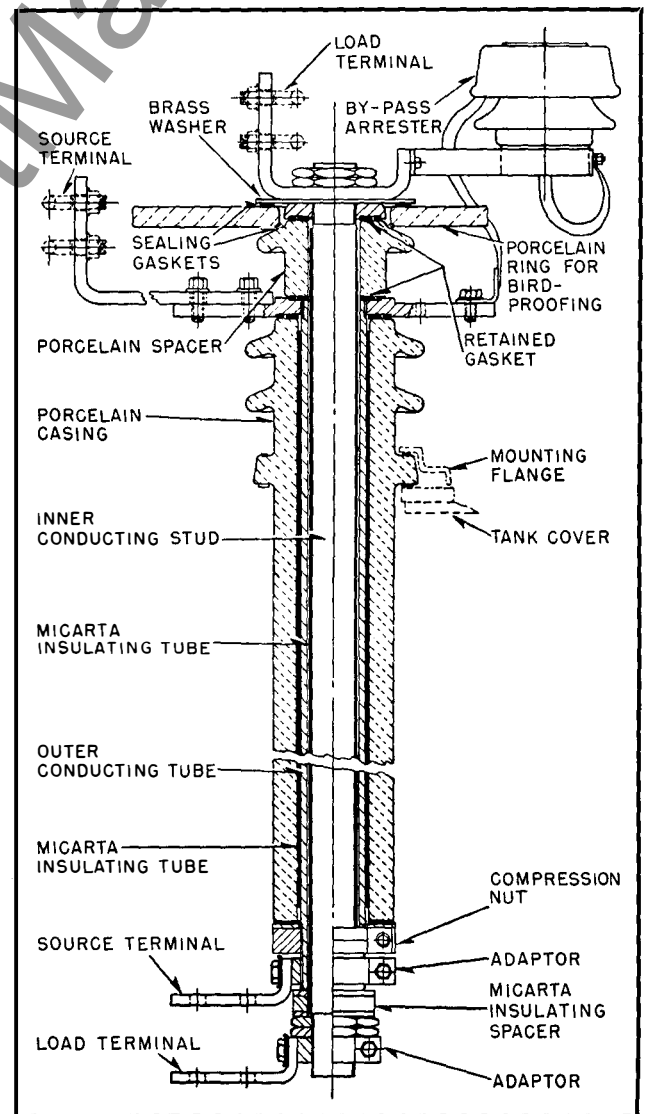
Concentric Lead Bushing with Bird-proofing for Type URS Step Regulator
